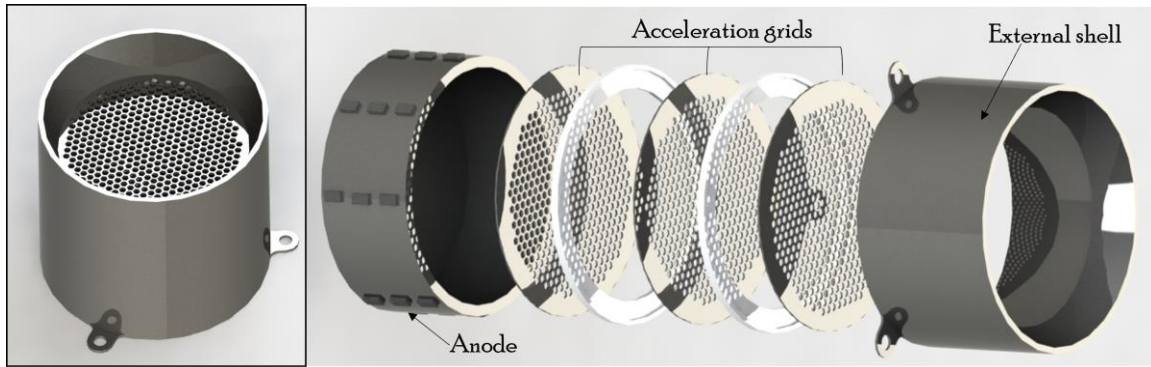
CAD model of a gridded thruster. To the right, chamber and shell to be redesigned for AM
